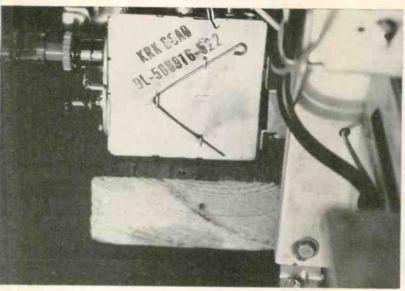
Close-up of an installed UHF tuner shows a wood block under it. This block is secured to the chassis or snug-fitted between the tuner and the set's cabinet shelving to provide support.
